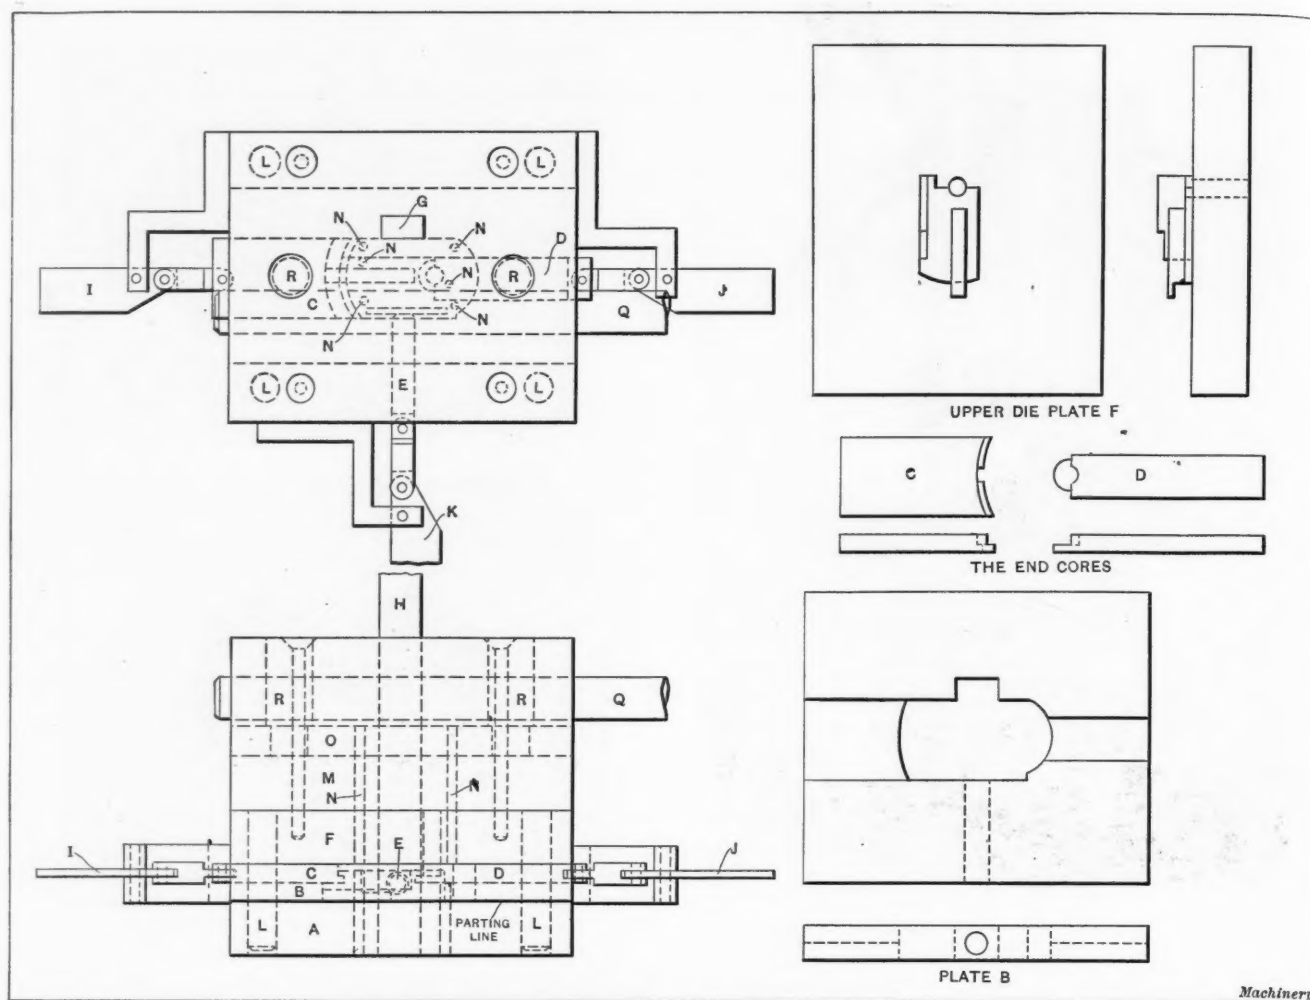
Die-casting Mold for the Lens Chuck Base shown at C, Fig. 9
